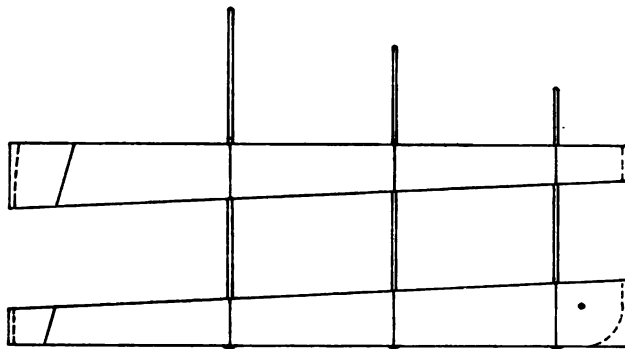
Showing How Straight Dowels are First Driven Through Bottom Board and How Each Board Above is then Driven Down into Place
